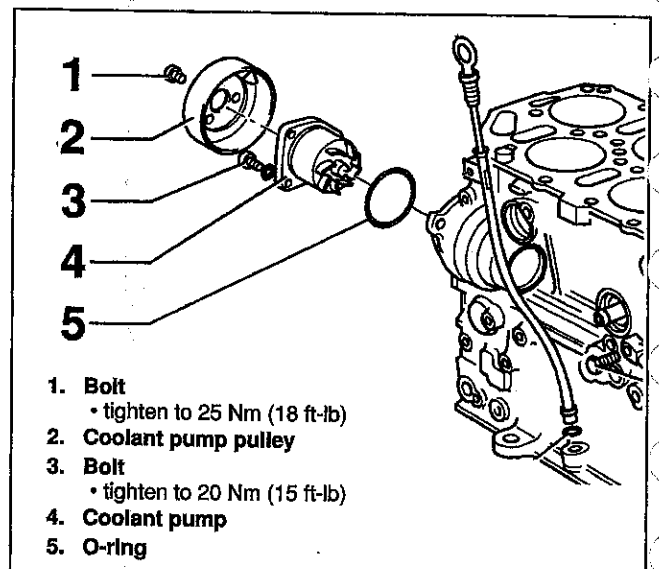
Exploded view of coolant pump on 6-cylinder engine.
